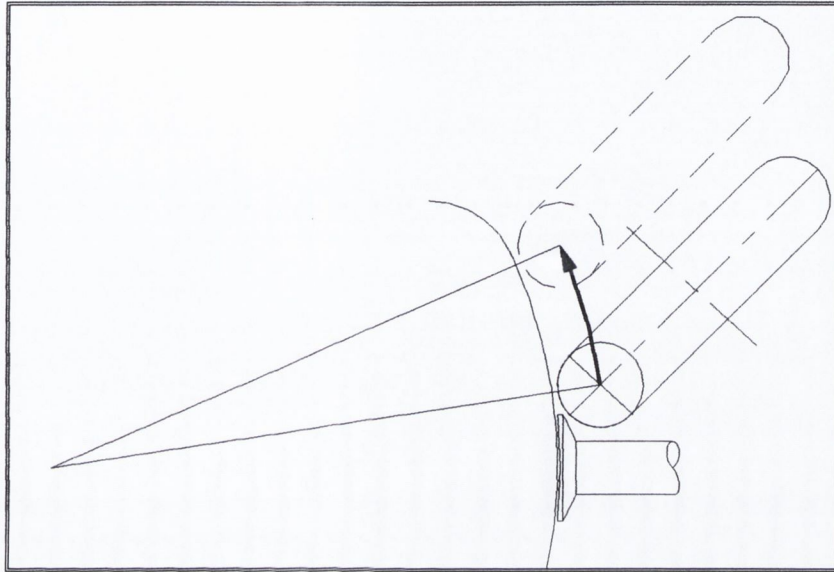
Basic Tool Motion Equidistant from the Surface of Former
